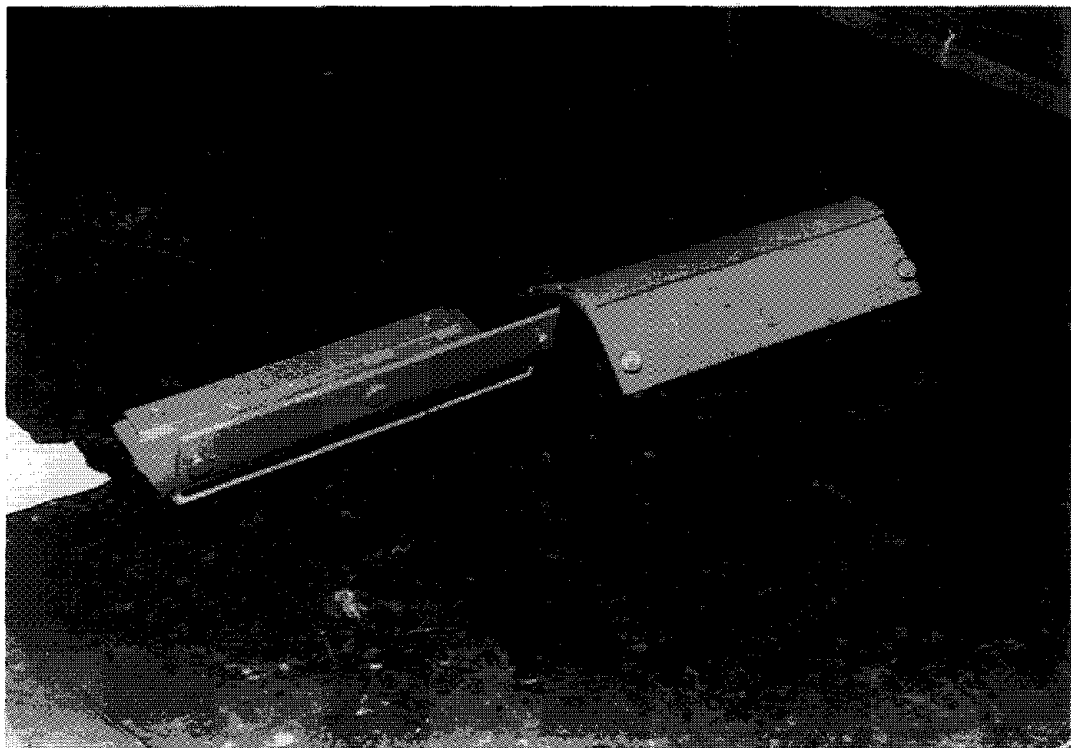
Wall Bracket Photograph, Showing Holes for Mounting to the Lower Seat Pan, Track Locating Pin, Feet for Track
